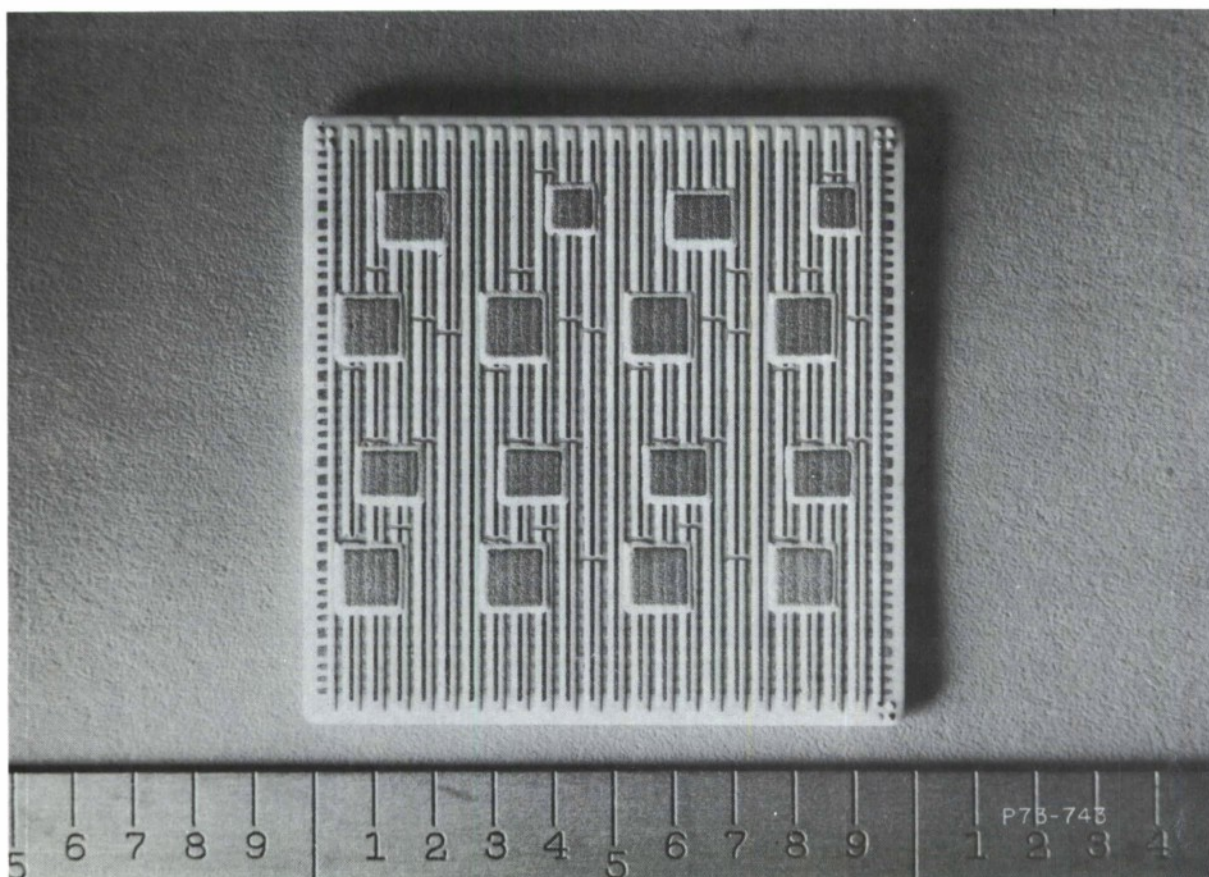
Metalized dielectric chip mounting pads with cuts in top and bottom conductors for interconnecting purposes.
